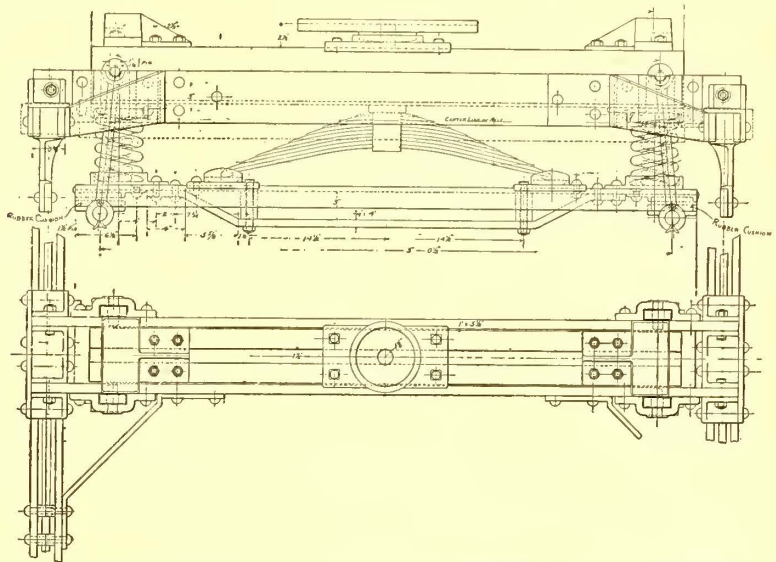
SIDE ELEVATION AND PLAN OF SPRING PLANK AND BOLSTER
